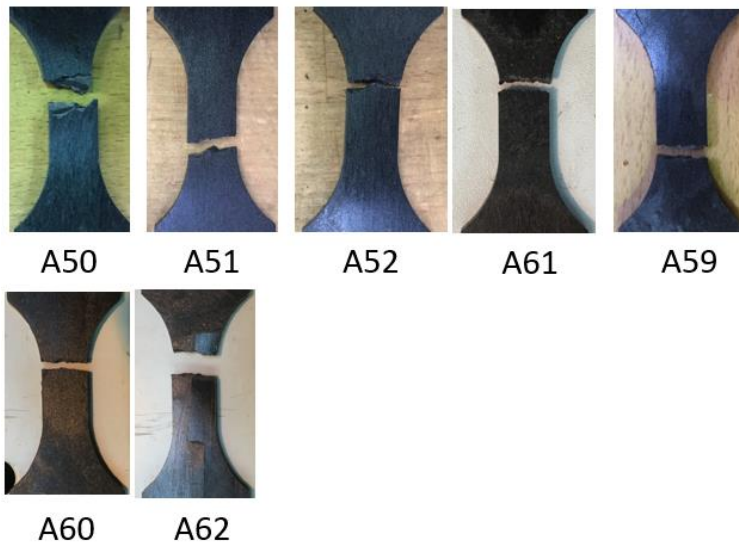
Fracture specimens for 0° coupons at R=0.
